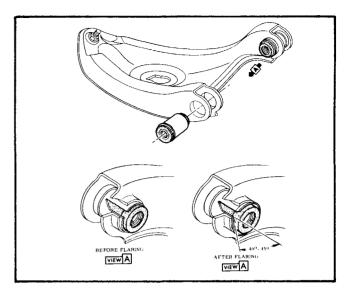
Flaring Lower Control Arm Front Bushing (B & F Series)
